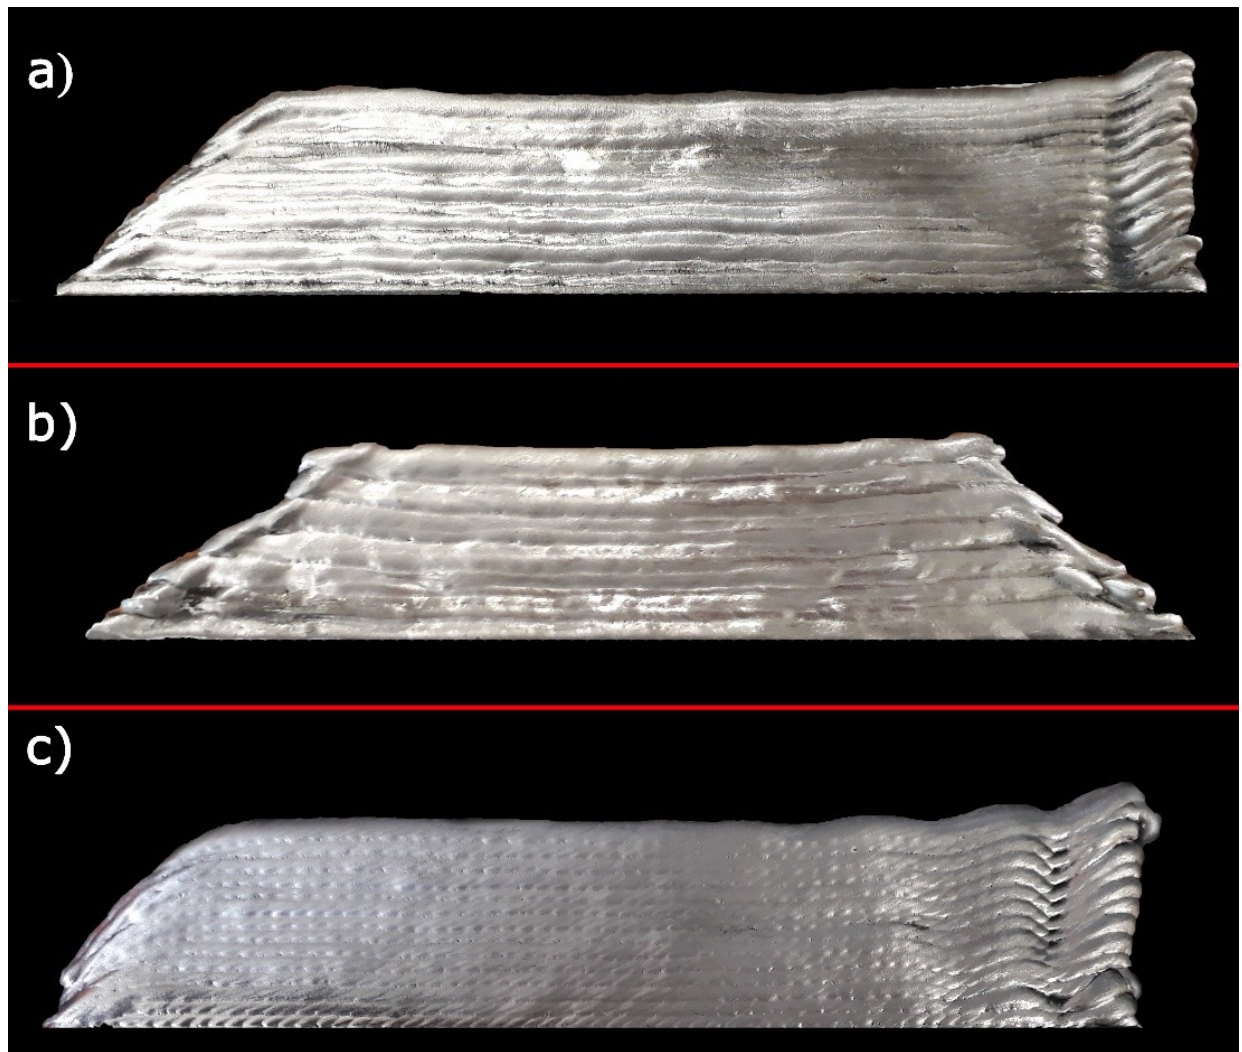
Walls built up using different techniques: a) unidirectional welding; b) bidirectional welding; c) switchback mode (for (a) and (b) modes, the welding direction was from right to left)
